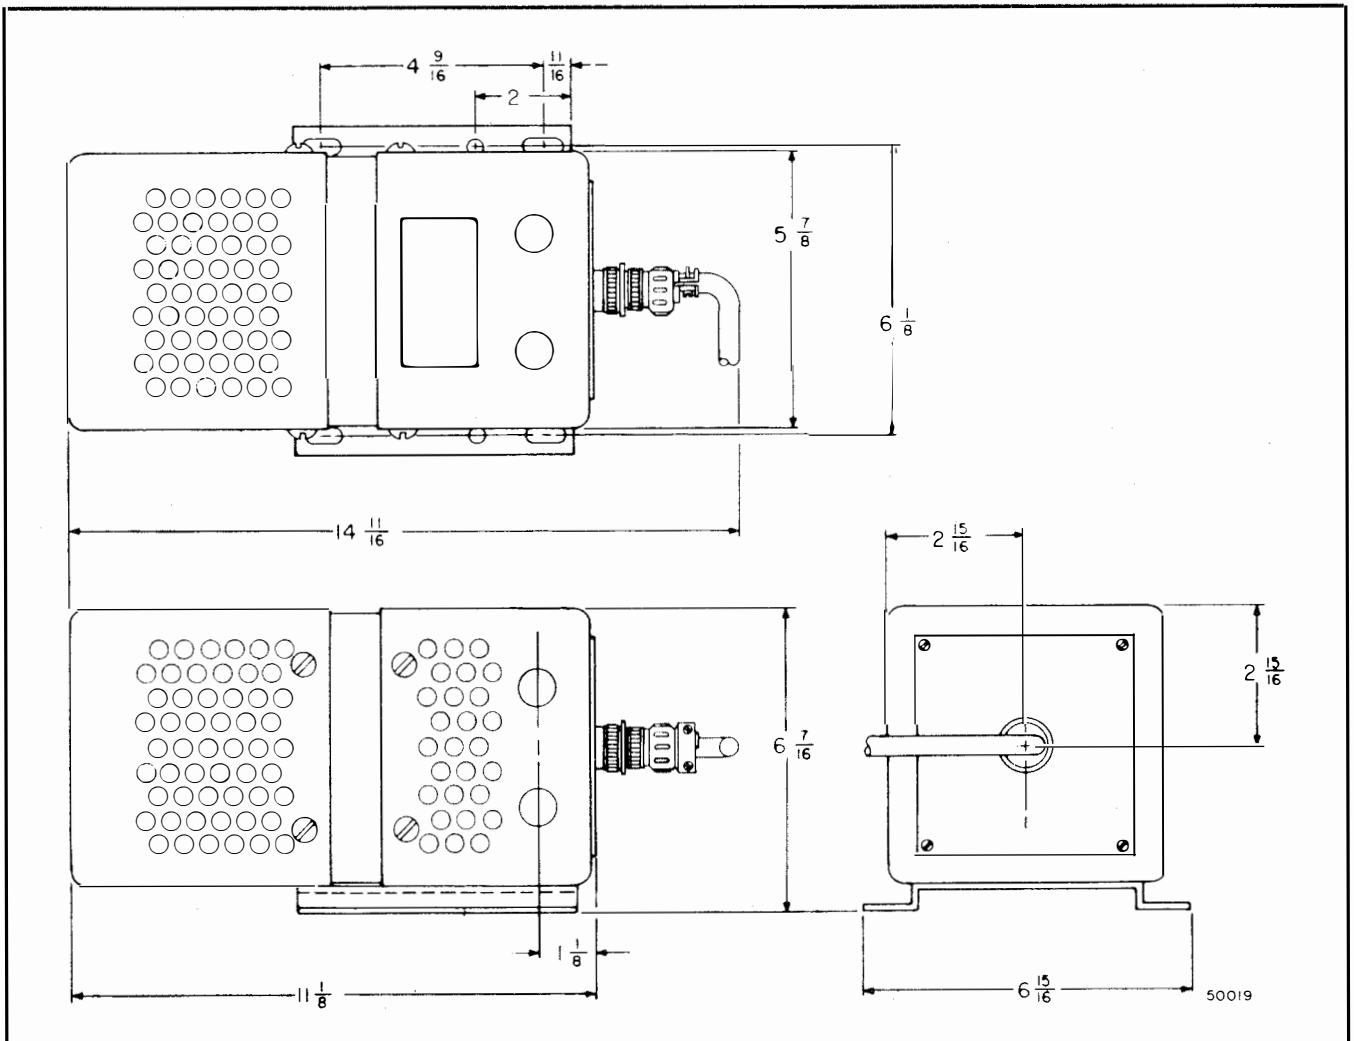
Outline Dimensional Drawing, Constant-Voltage Transformer
